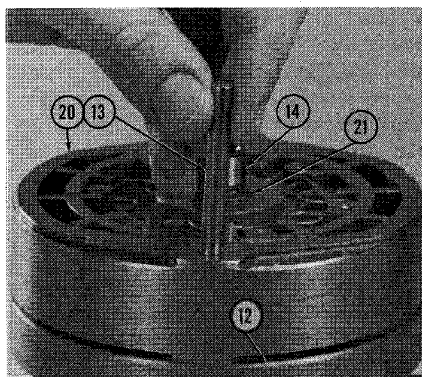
Removing dowel pins (13) from motor ring and housing. Then, remove the snap ring (21) retaining rotor to actuator shaft (14).
